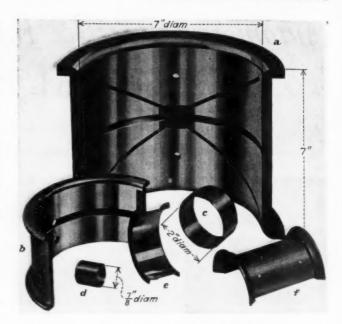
TYPICAL EXAMPLES OF STEEL-BACK BEARINGS
